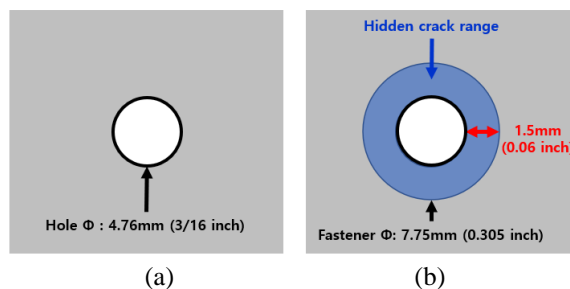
Schematics of fastener hole (a) without fastener and (b) with fastener
